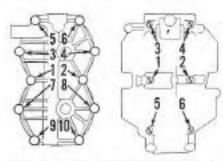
On Fleet Scott motors tighten the cylinder head screws to a torque of 80 inch pounds in the sequence shown in the left view, Tighten the crankcase main bearing screws to a torque of 80-90 inch pounds in the sequence shown in the right view, then tighten the flange screws to a torque of 70 inch pounds.
